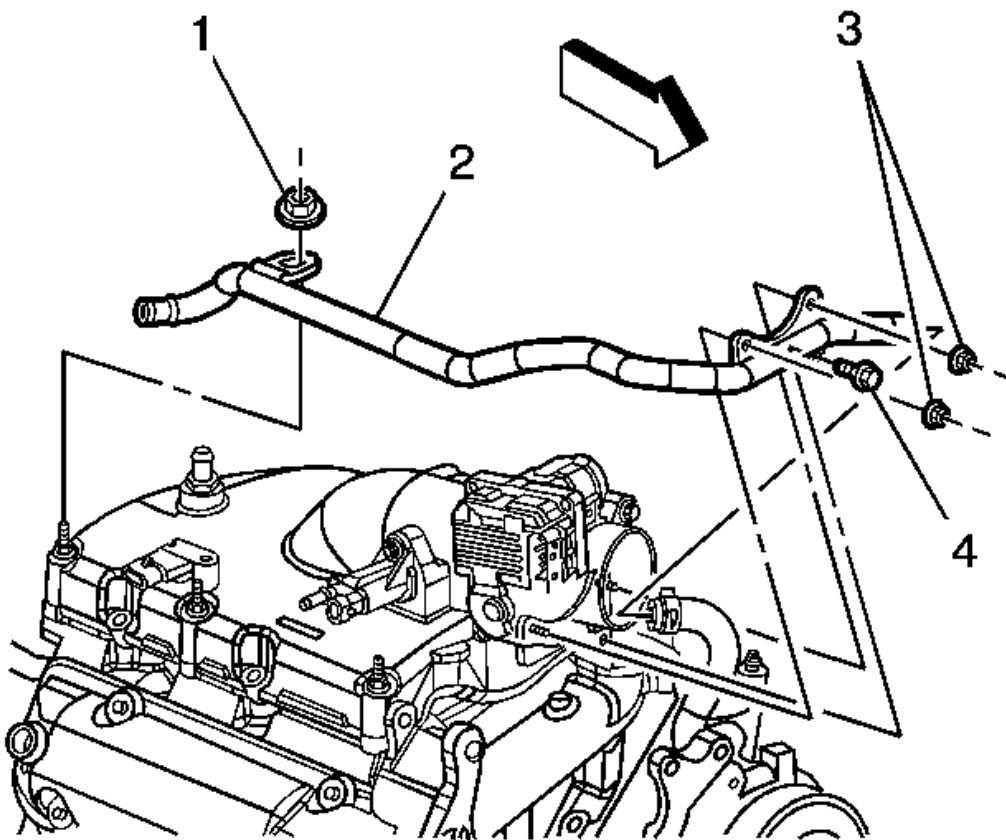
View Of Heater Outlet Pipe, Nuts & Bolts
